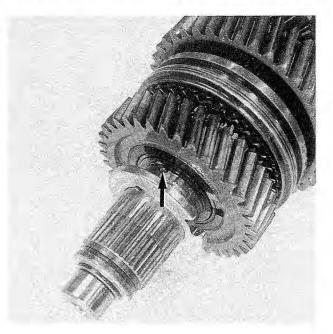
Thrust washer and ball between 2nd and 3rd gear. Ball in shaft (arrow) prevents washer from rotating.
